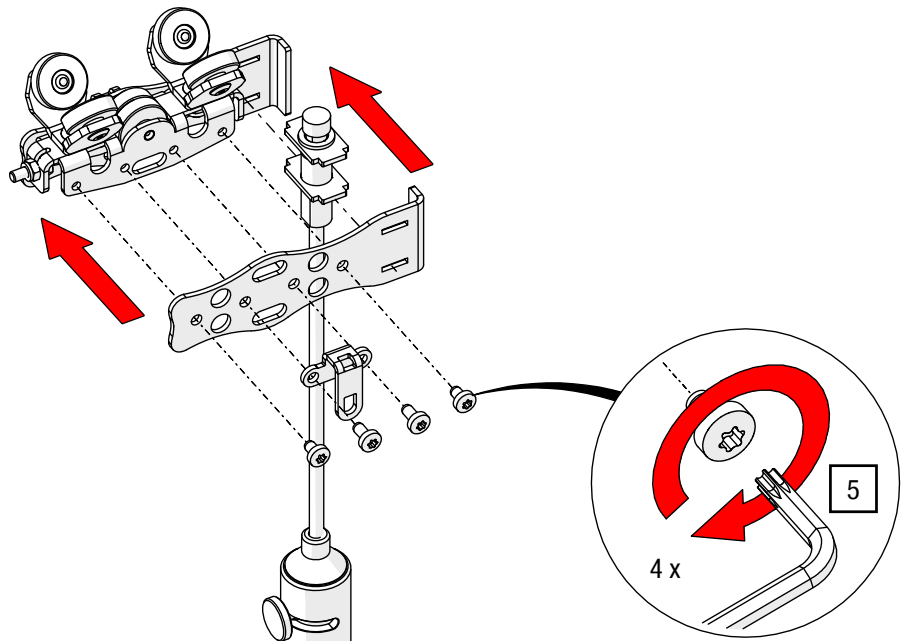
Master runner with add-on brake – Mount opposite side plate with brake
